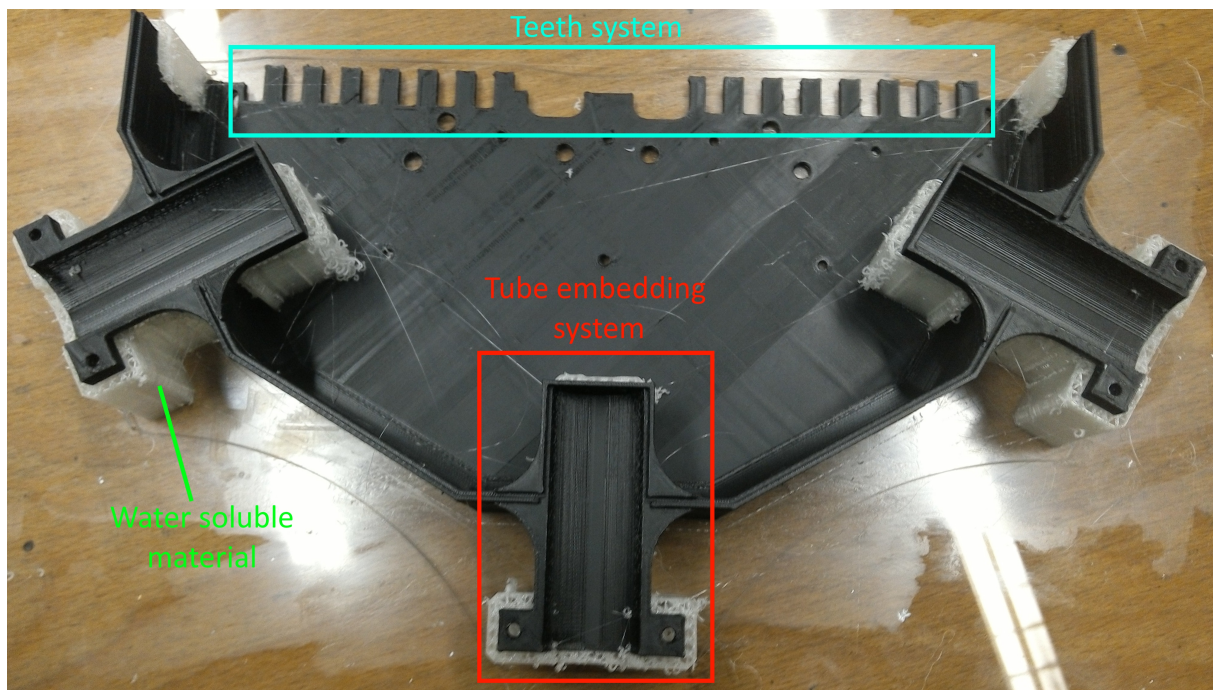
Final half top plate 3D printed. For a complete drone, 4 parts like this one were needed.
